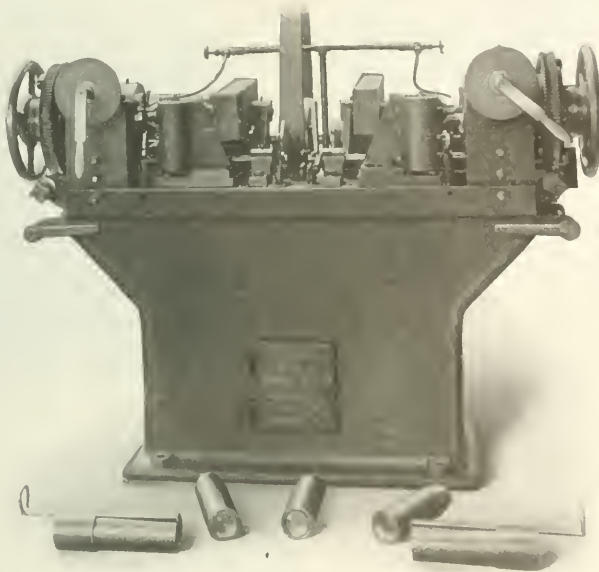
Thomson Semi-automatic Thread Milling Machine for threading Shells
